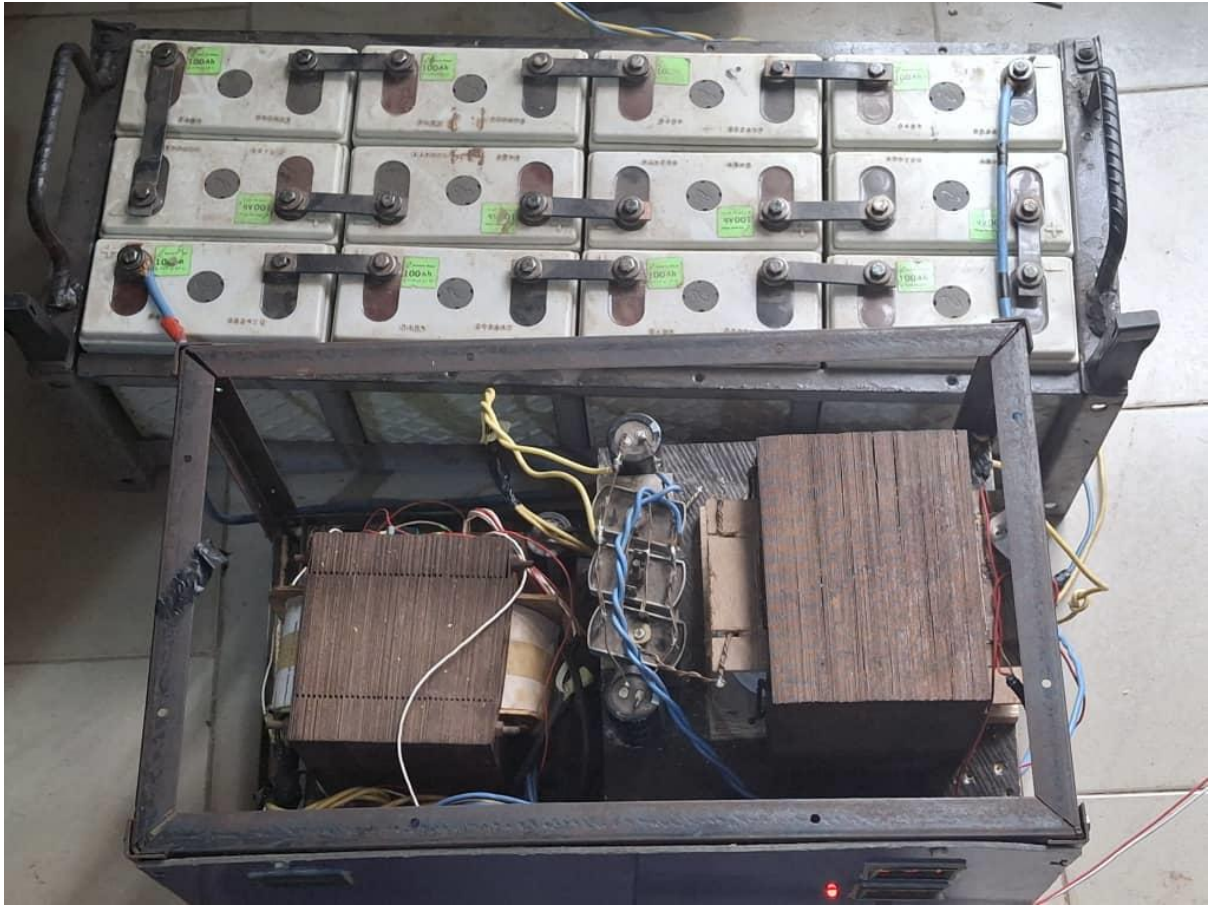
Hybrid Arc Welding Machine interior view showing the welding and charging transformers.
